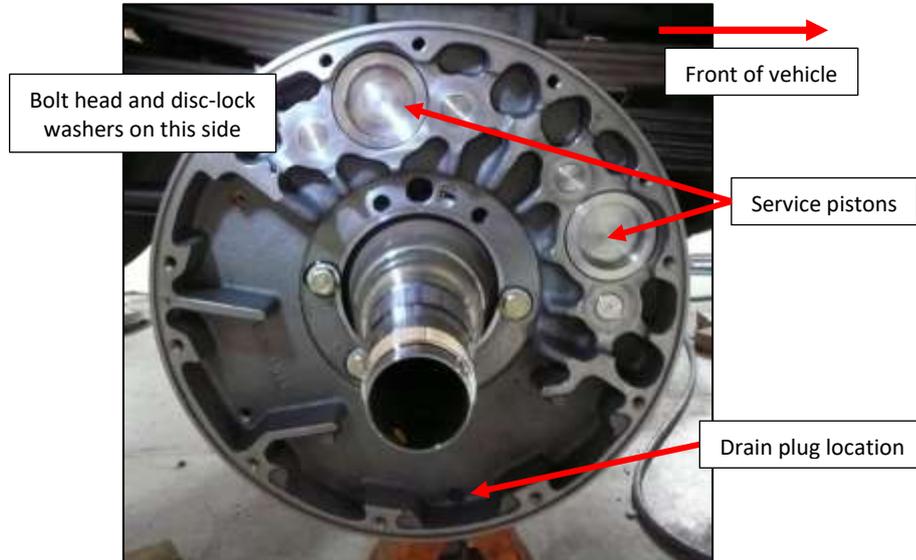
Attach mounting spacer and inner housing to vehicle.
